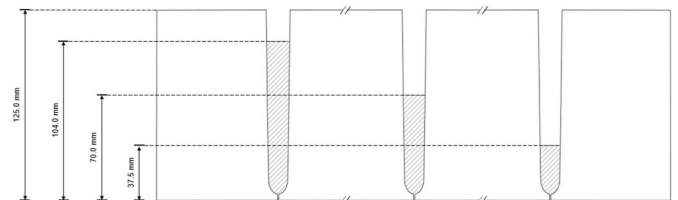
Partially filled weld samples with weld fill of 104.0 mm, 70.0 mm and 37.5 mm.
